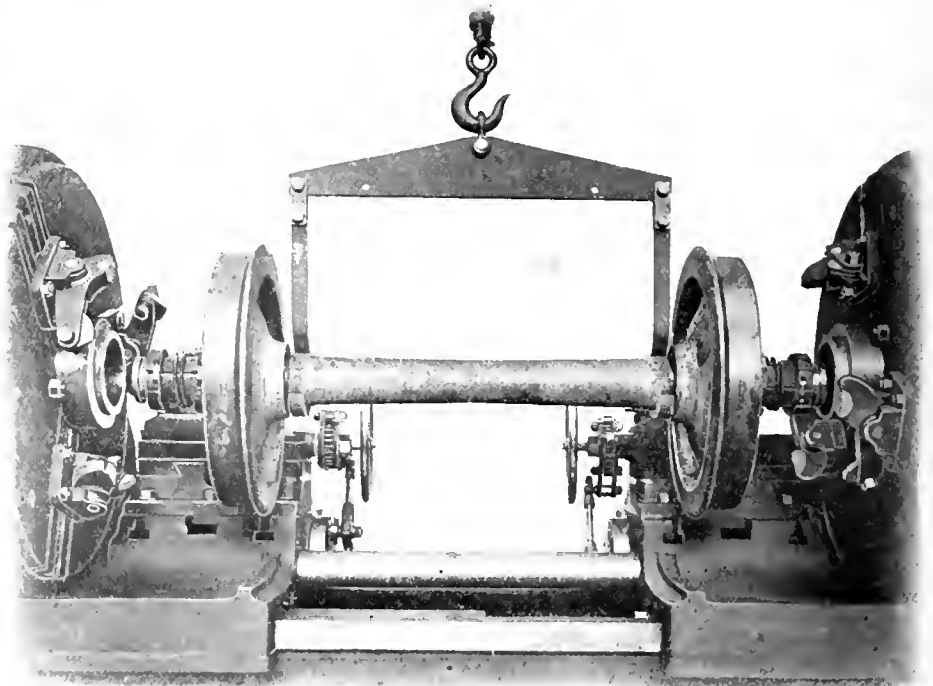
Turned Wheels being lifted out of Lathe. Note Faceplate Drivers, Rushings on Journals and Tracks cast on Headstock Extension to match Shop Track
